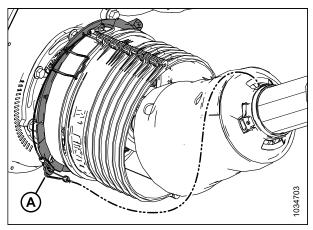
Driveline Safety Chain Secured to Float Module Gearbox
